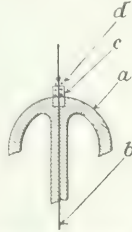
Vacuum-Tight Seal between Iron and Glass.
